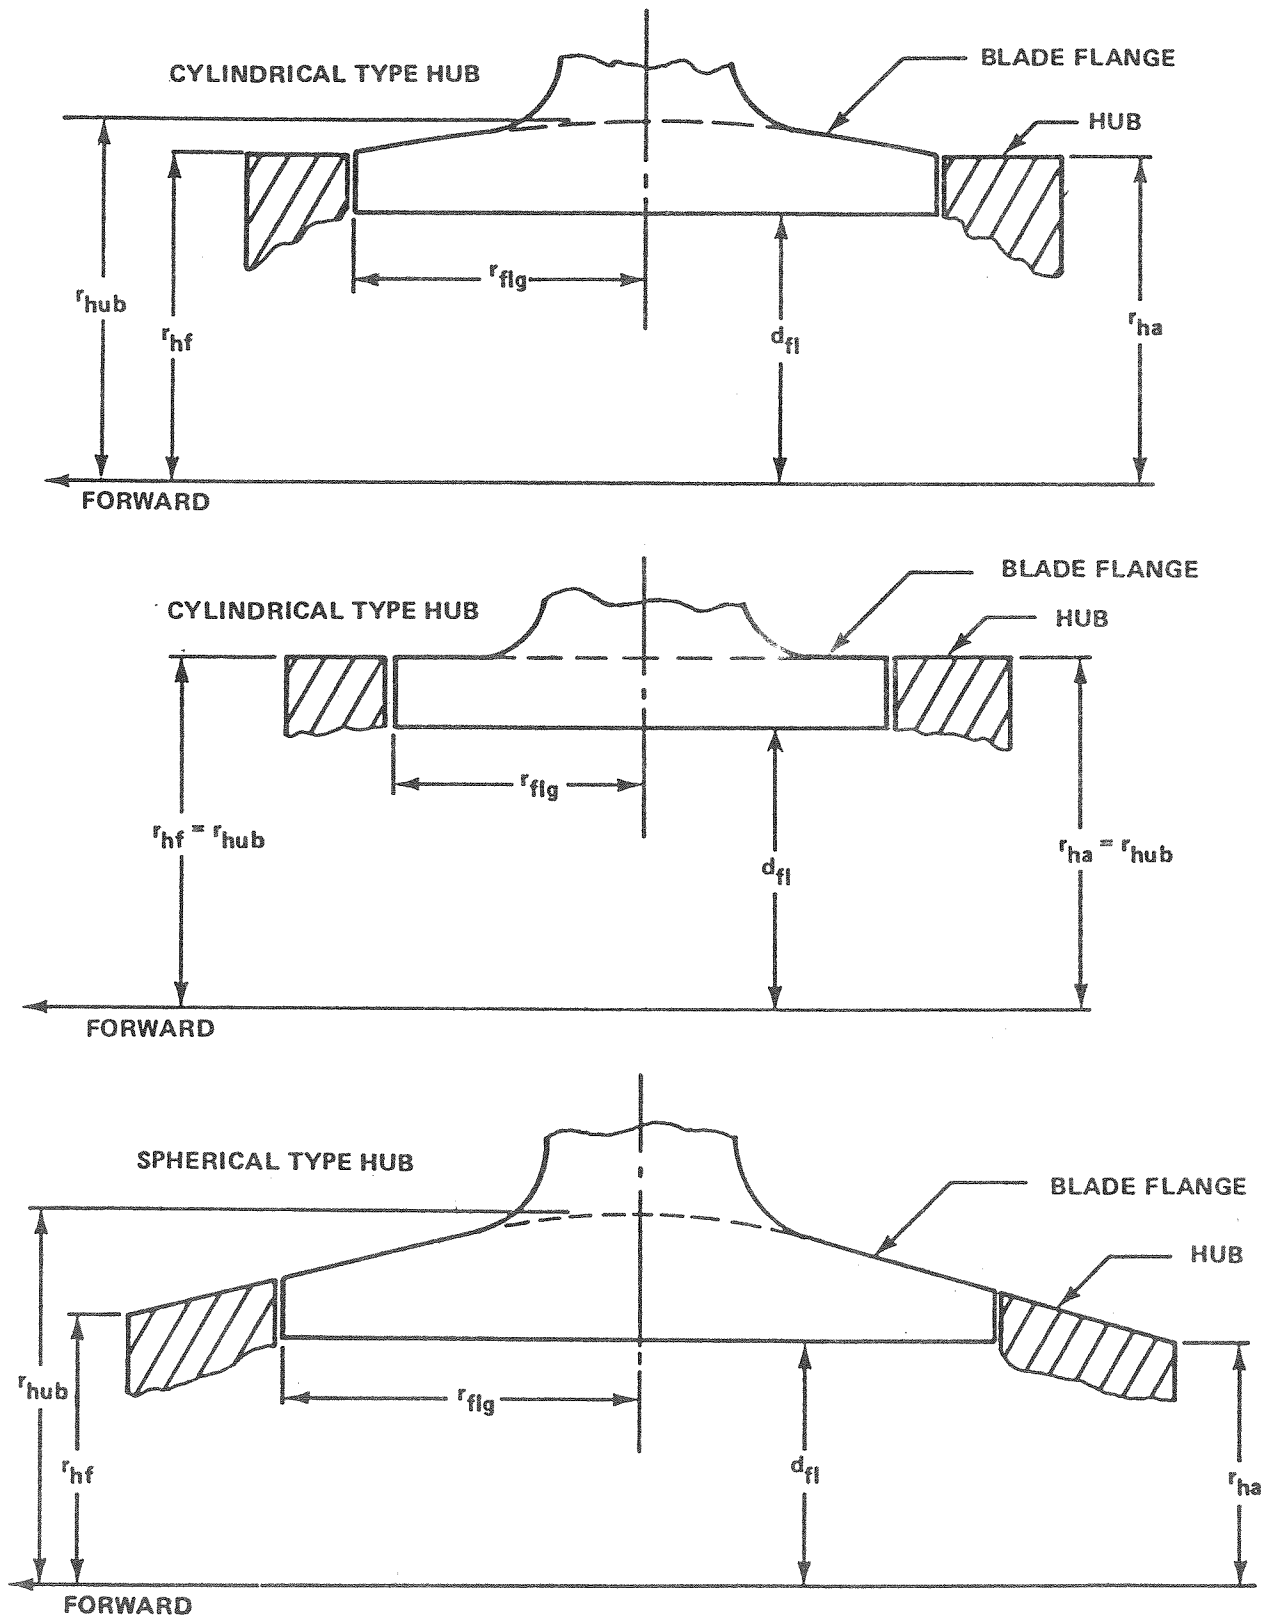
Dimensions Used in Table II for Hub and Blade Flange
